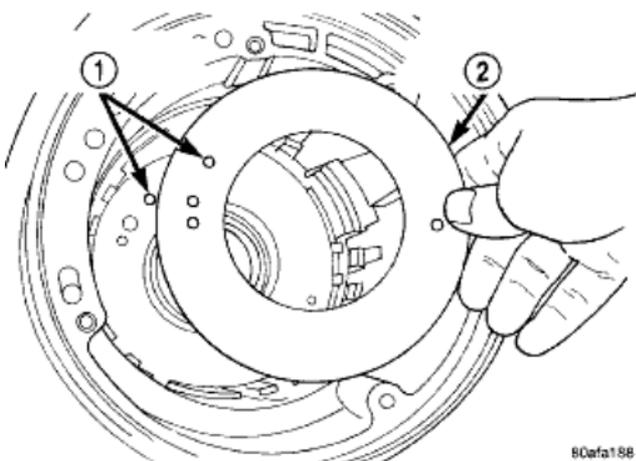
Removing/Installing Low/Reverse Piston Retainer-To-Case Gasket
